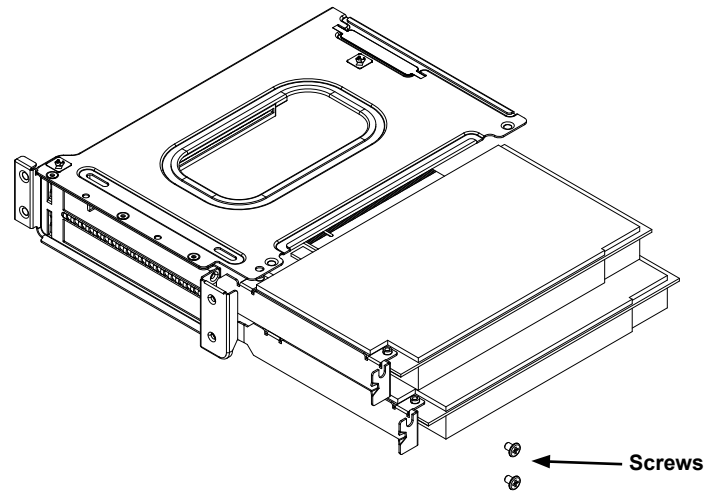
Inserting the Expansion Card into the Riser Card Bracket
